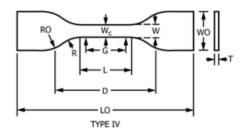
ASTM D638 type IV specimen (ref. ASTM D638-14)
